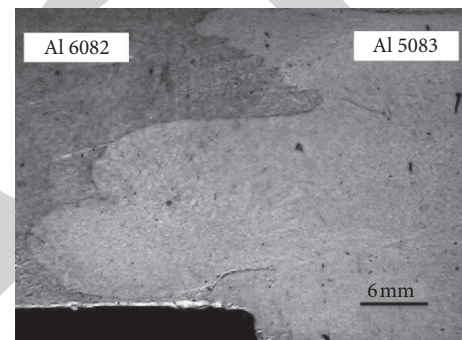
Macrostructure of sample 4, underwater welded specimen joined at 1000 rpm, 36 mm/min.
